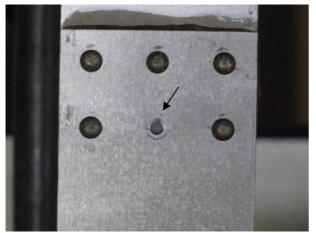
(b). LPS-3 treated specimen tested at 9kN with rivet head failure.
